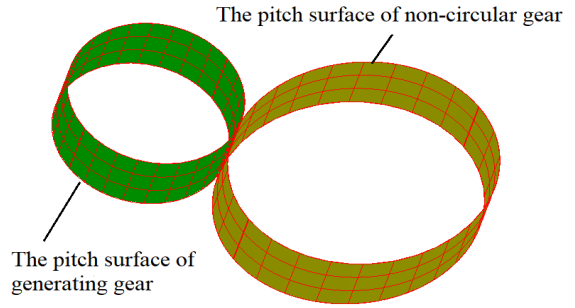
Basic principle of using cylindrical gear shaper to produce NCGs
